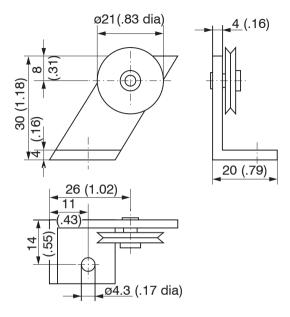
Guide pulley TR3-WDS fix with mounting socket, dimensions in mm (inches)
